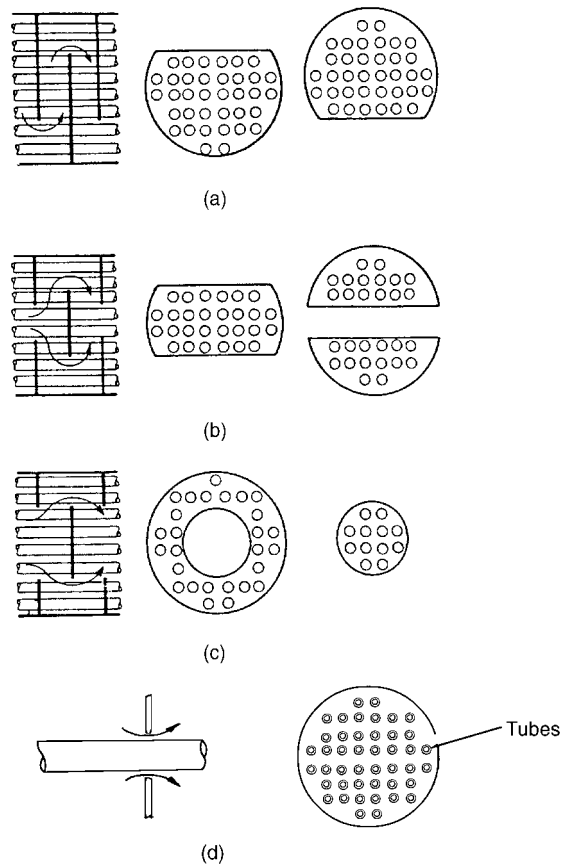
Types of baffle used in shell and tube heat exchangers. (a) Segmental (b) Segmental and strip (c) Disc and doughnut (d) Orifice
